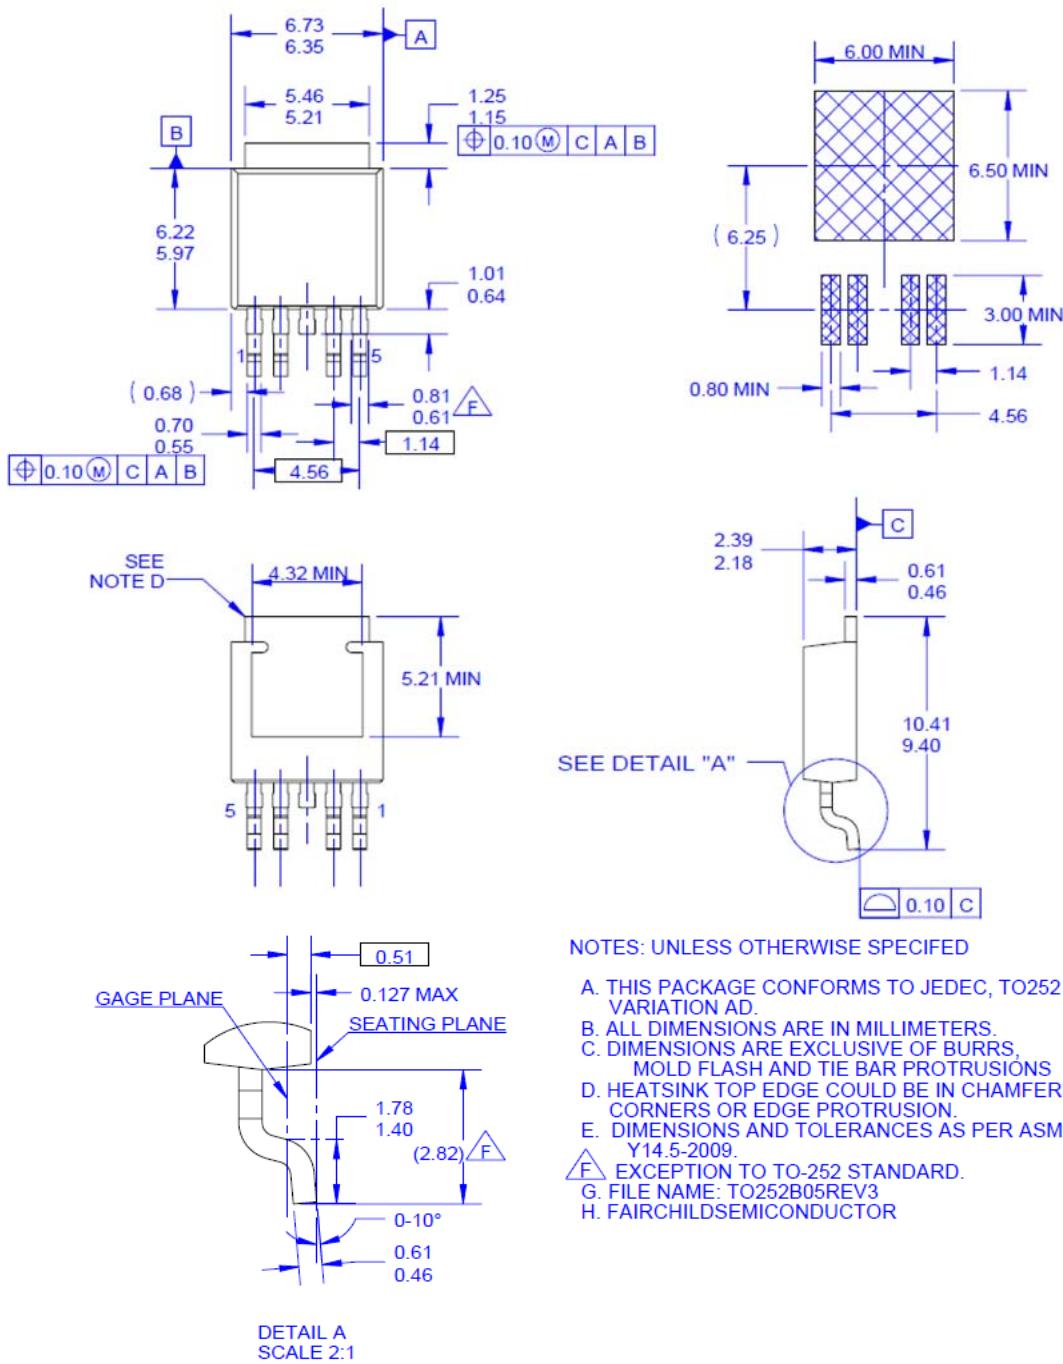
TO-252 5L (DPAK) - 5LD, MOLDED TO252, OPTION AD
